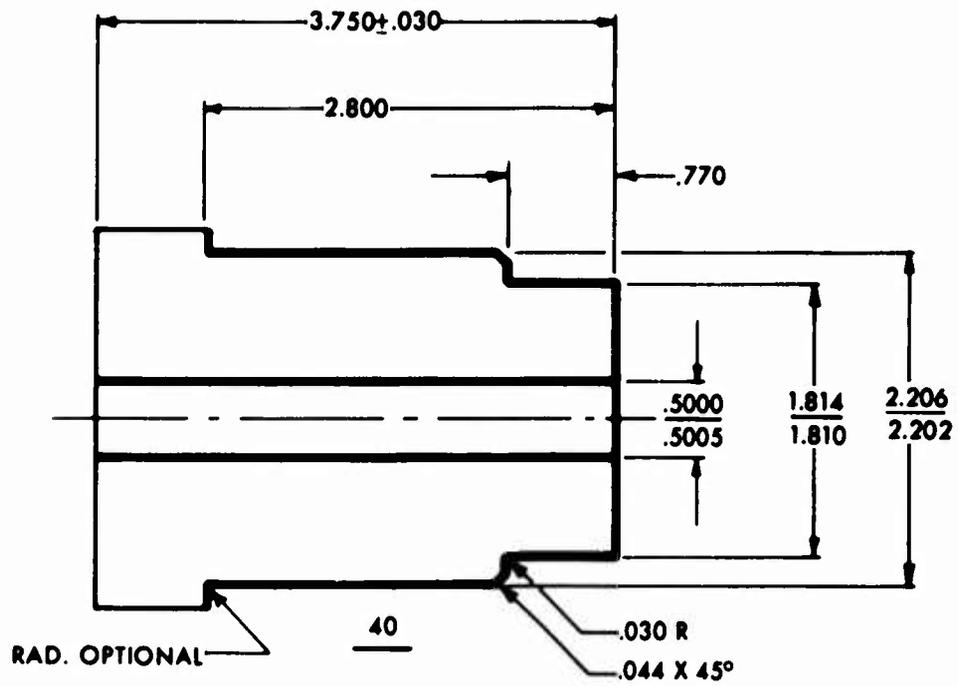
RG351-11182-105, Machine Operation Drawing. (Sheet 1 of 4.)
